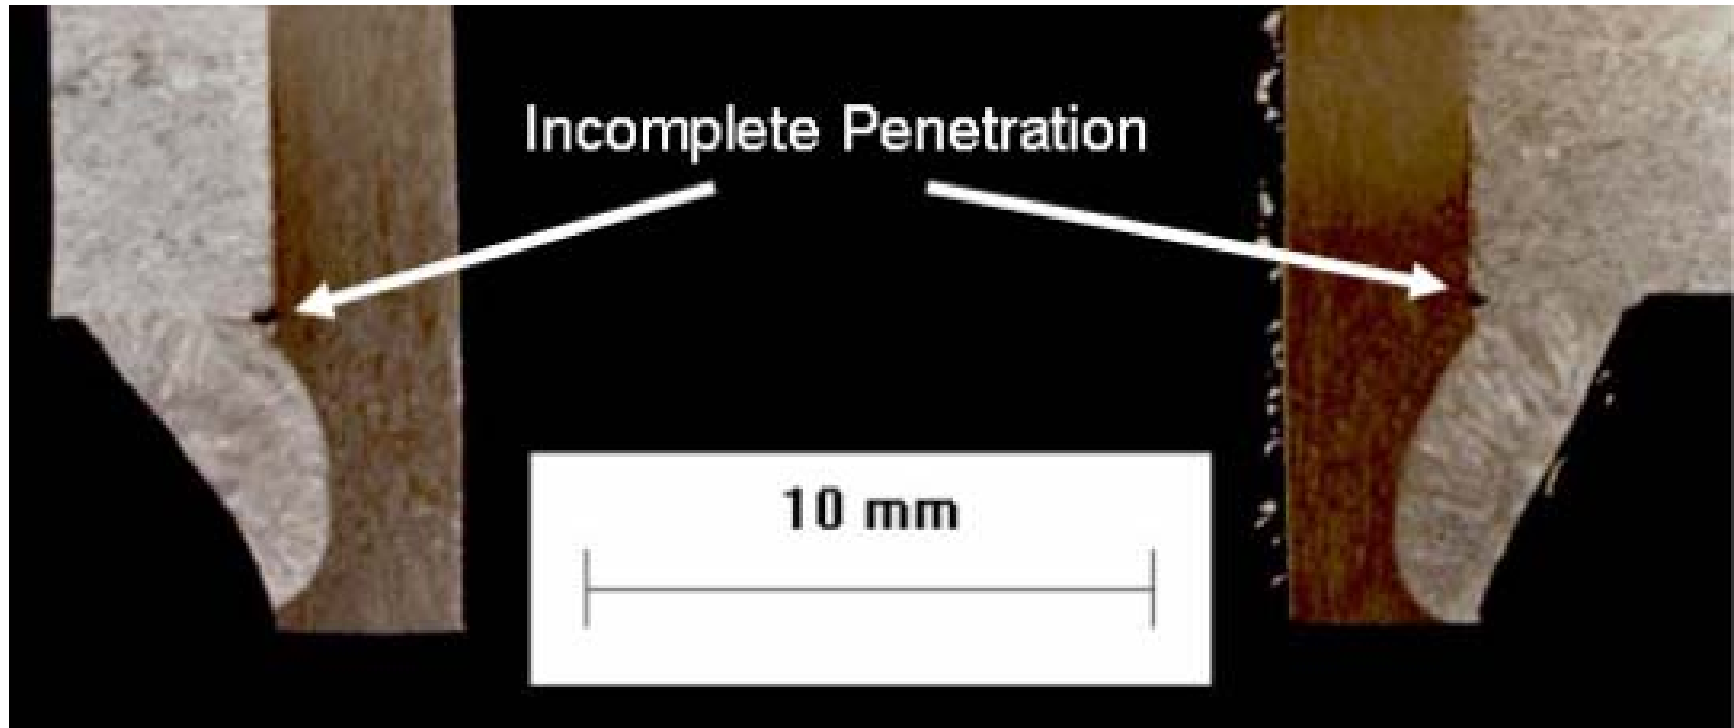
Cross-Section ACT Weld with Incomplete Penetration
